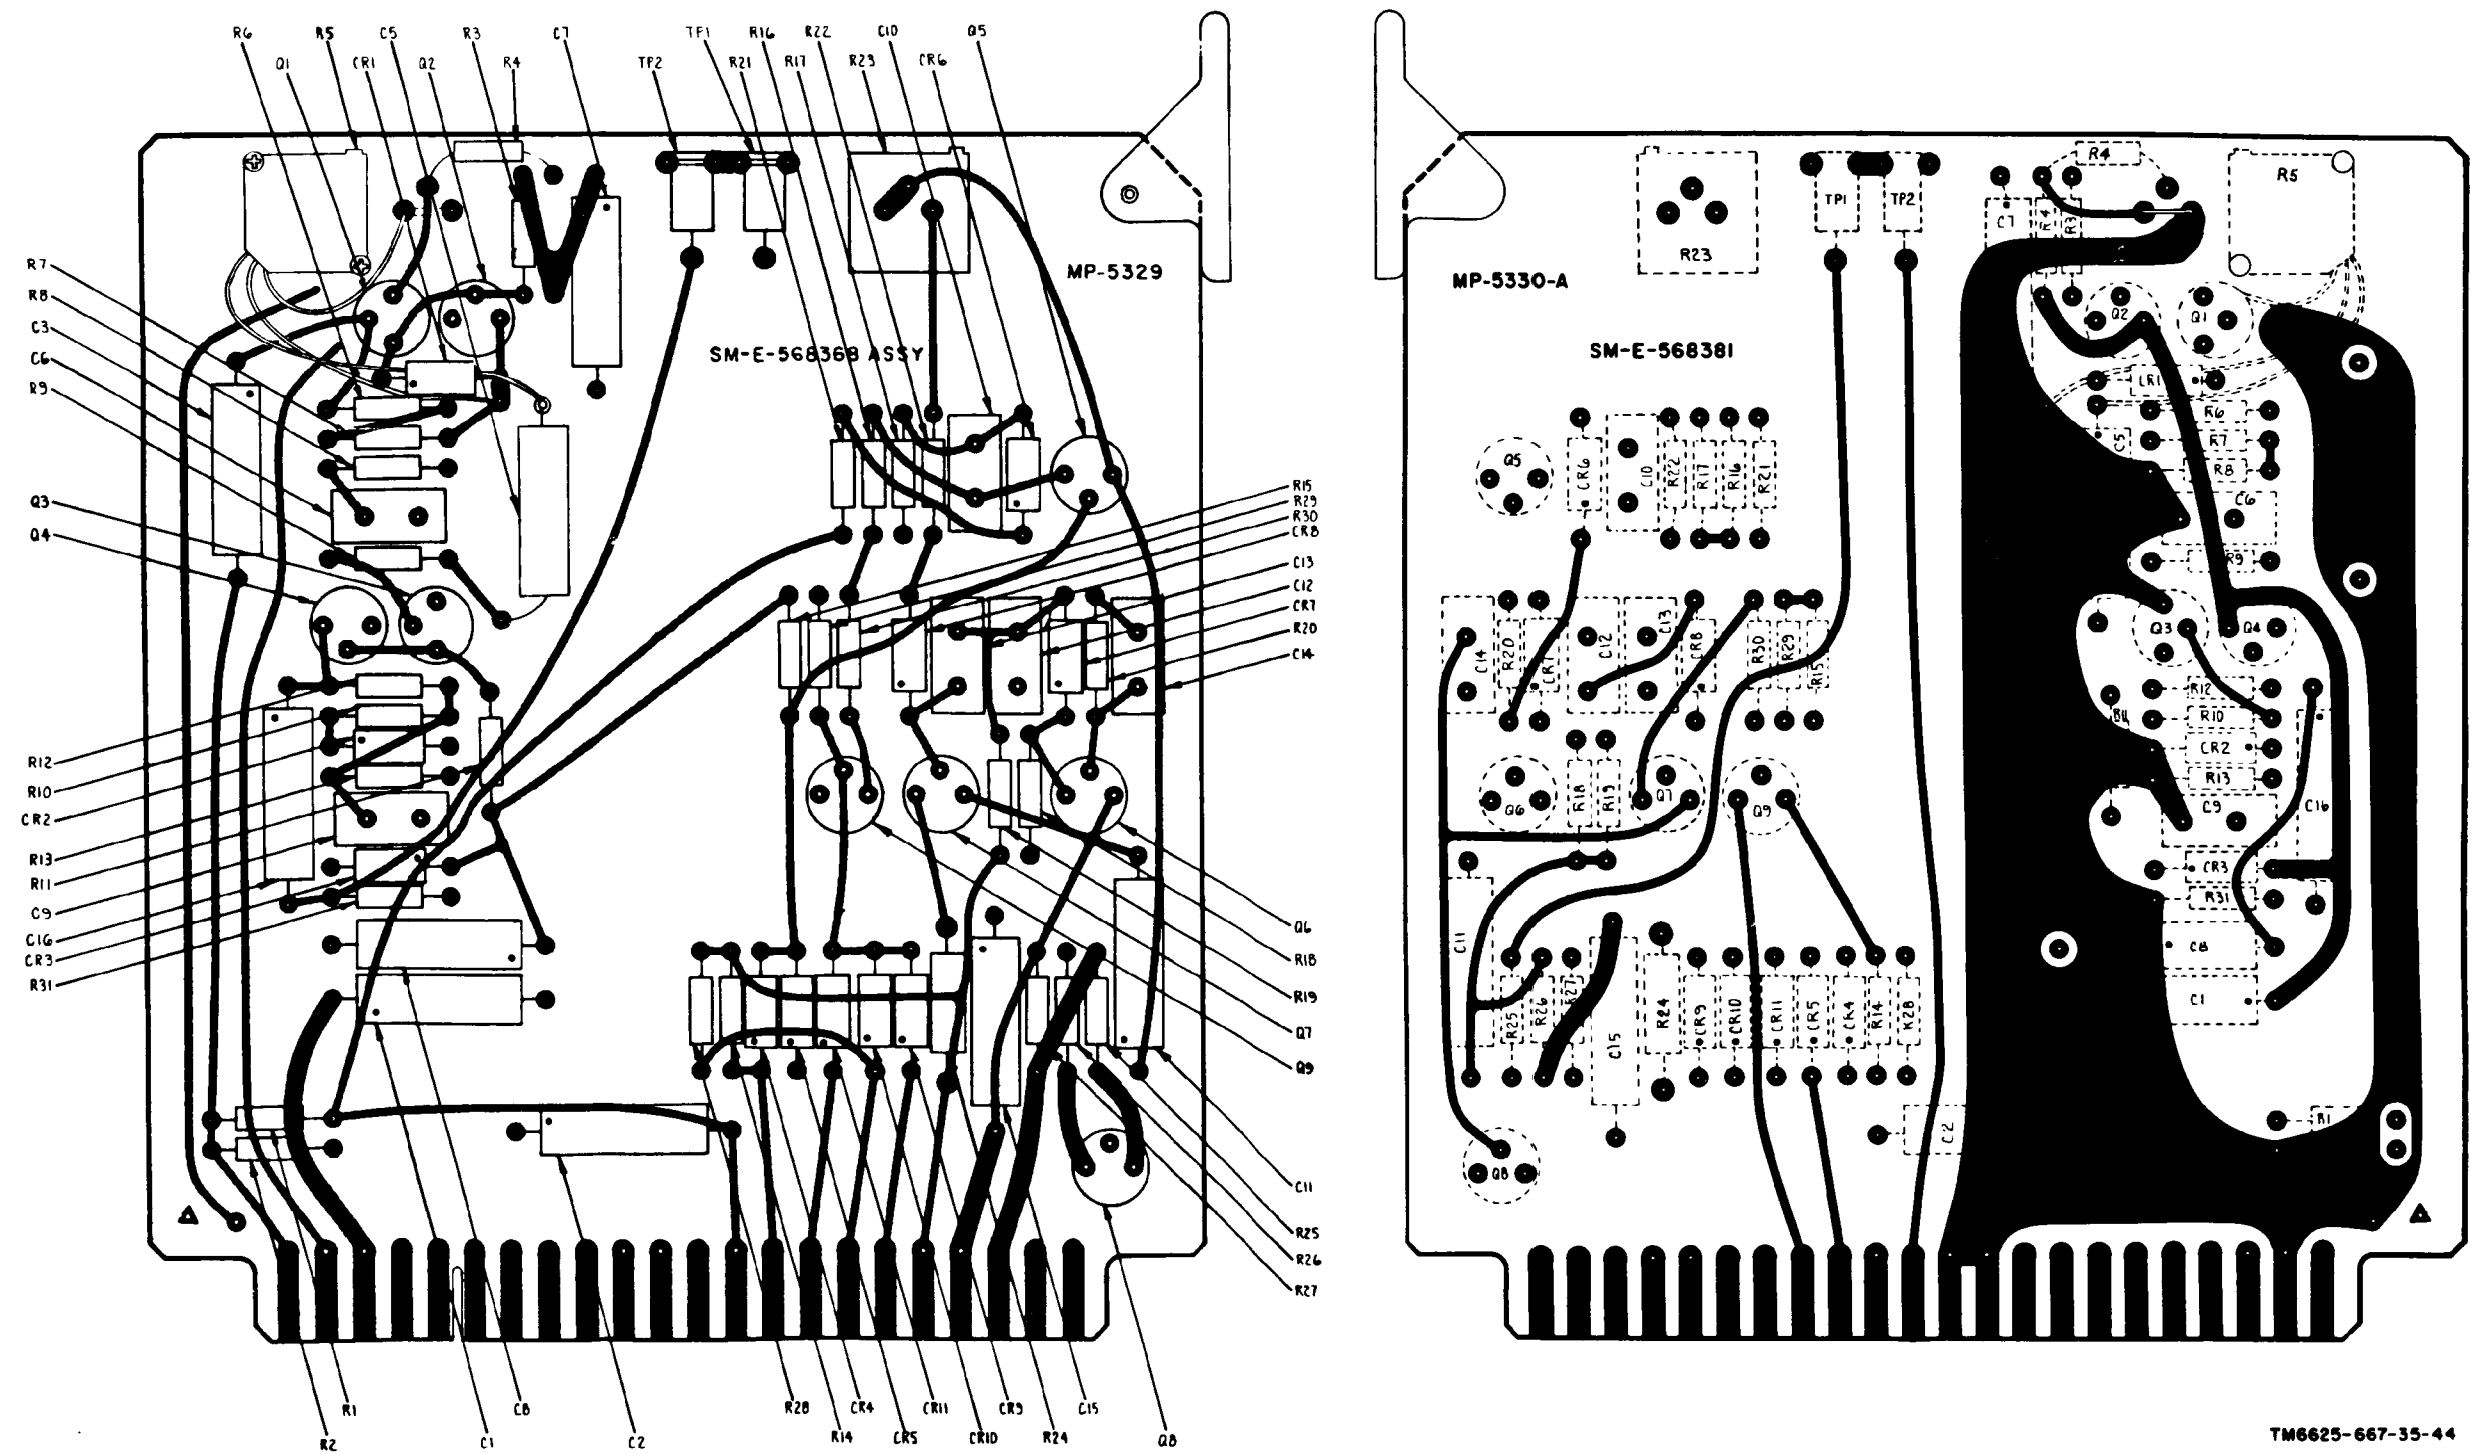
Decoder module A8, wiring diagram and parts location.
